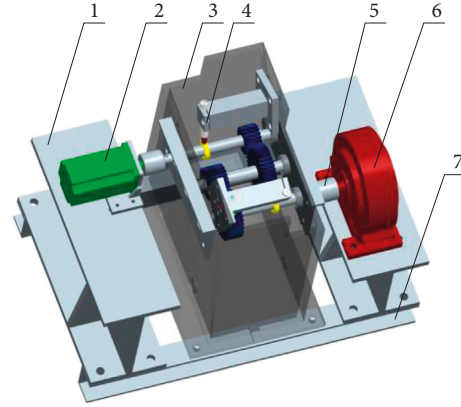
Gear drive active control system with a built-in piezoelectric actuator. (1) Bracket. (2) Adjustable speed motor. (3) Gearbox. (4) Piezoelectric actuator. (5) Coupling. (6) Magnetic powder brake. (7) Gearbase base.
